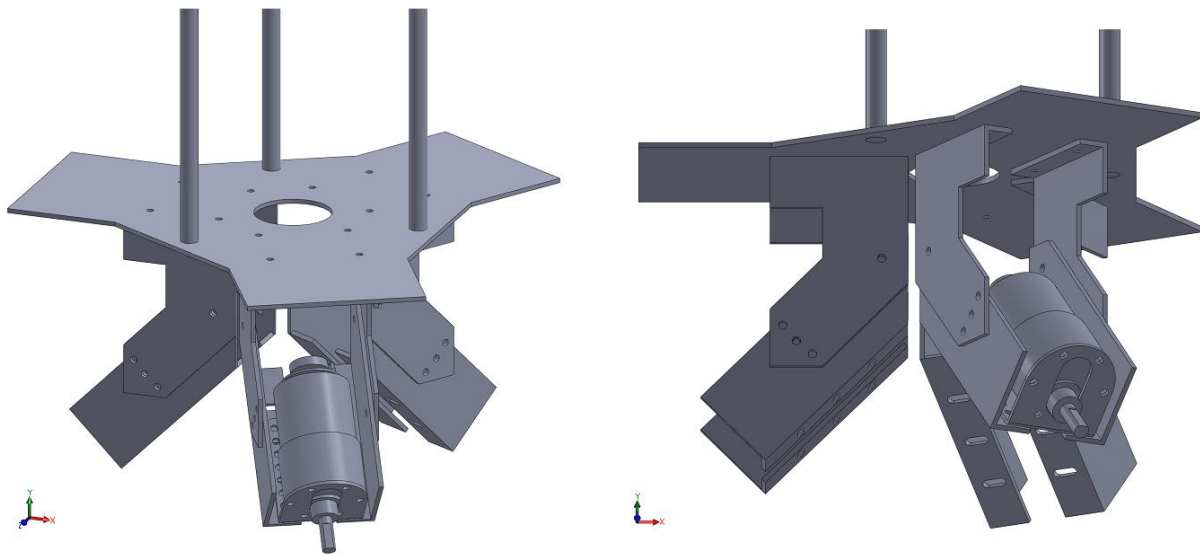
Assembly of structure bottom level with all the pieces and a motor.
